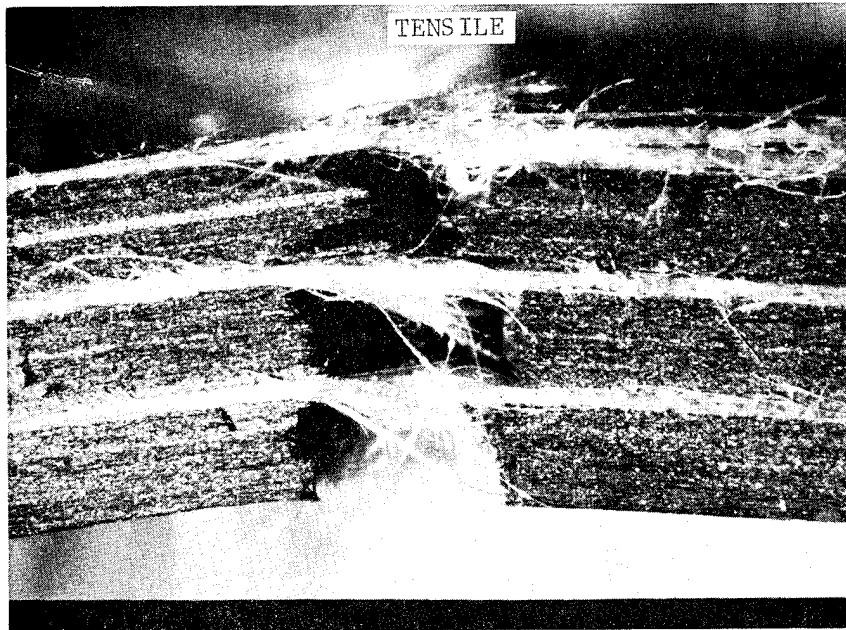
18X EDGE-VIEW OF IMPACT FRACTURE AREA OF PANEL #17 MODULITE 5206/PRD-49
